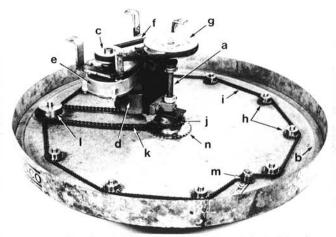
Underside of turntable. a, center shaft; b, track for ball bearings; c, pulley on gear box shaft; d, electric motor; e, gear box; f, V-belt; g, pulley on center shaft; h, sprockets on plate shafts; i, chain that rotates plates; j, stationary sprocket welded to gear box and motor support; k, drive chain; l, second sprocket on plate shaft; m, idler sprocket; and n, platform support plate.
